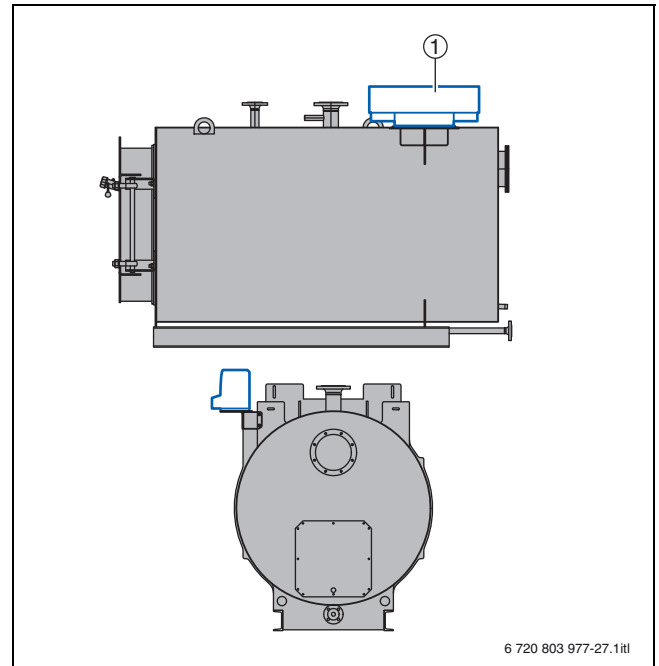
Side control unit holder for UNIMAT UT-L (example illustration)
